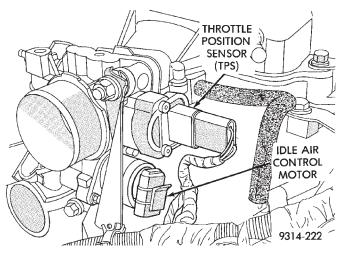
Throttle Body Electrical and Vacuum Hose Connections
